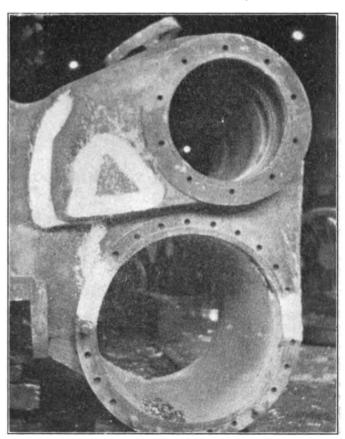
The Cylinder As It Appeared After Welding
